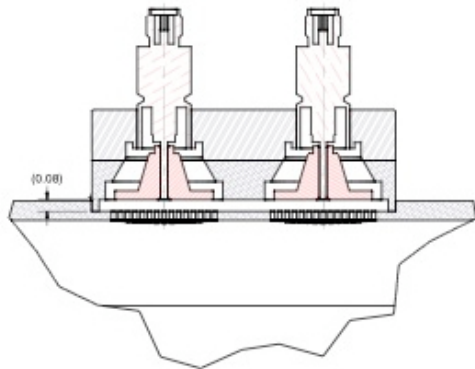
Section drawings of the Cesr-TA shielded pickup buttons (SPU1) and their assembly on the vacuum chamber.
